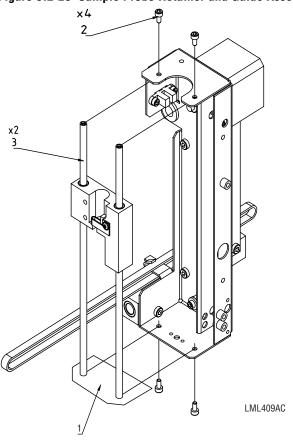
Sample Probe Retainer and Guide Assembly (See Table 8.2-25)
